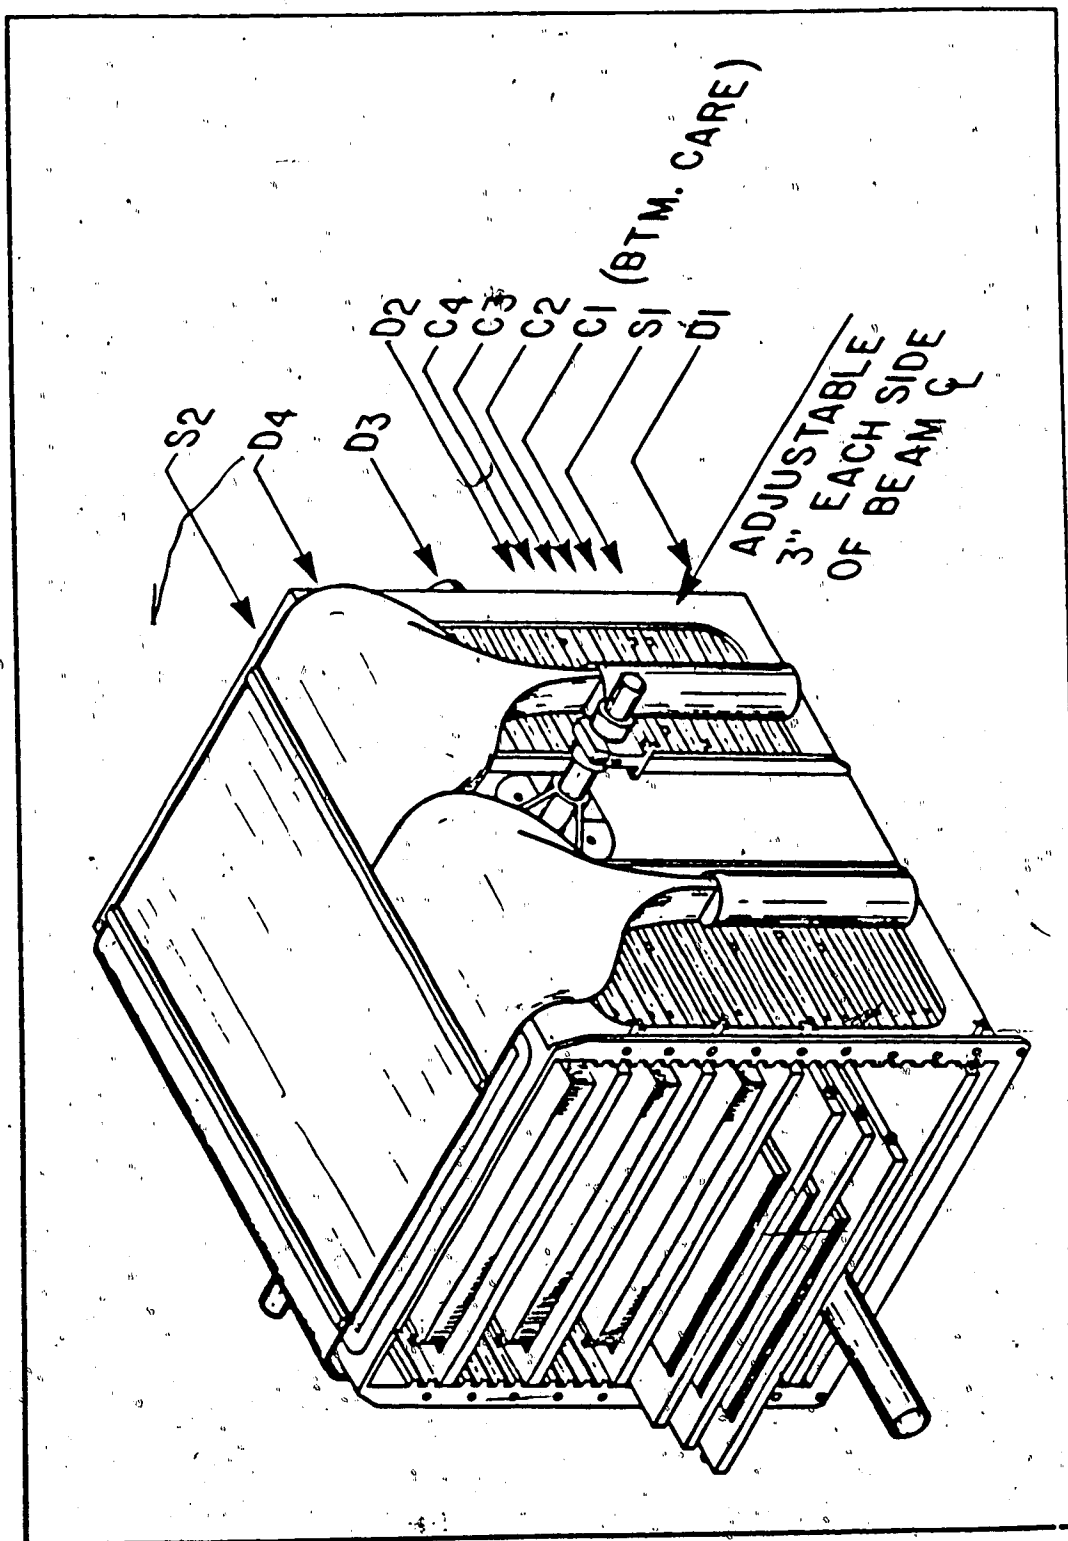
The Focal Plane Polarimeter Cage Assembly.
